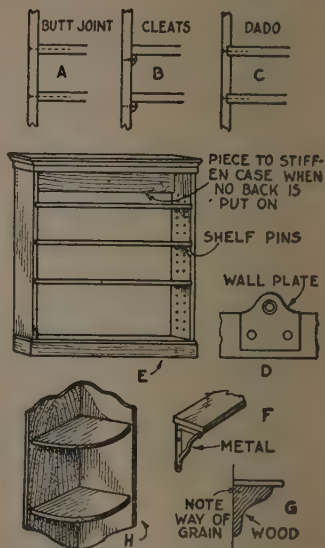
Joints for shelves; wall and corner shelving; and shelf brackets of wood and metal.
